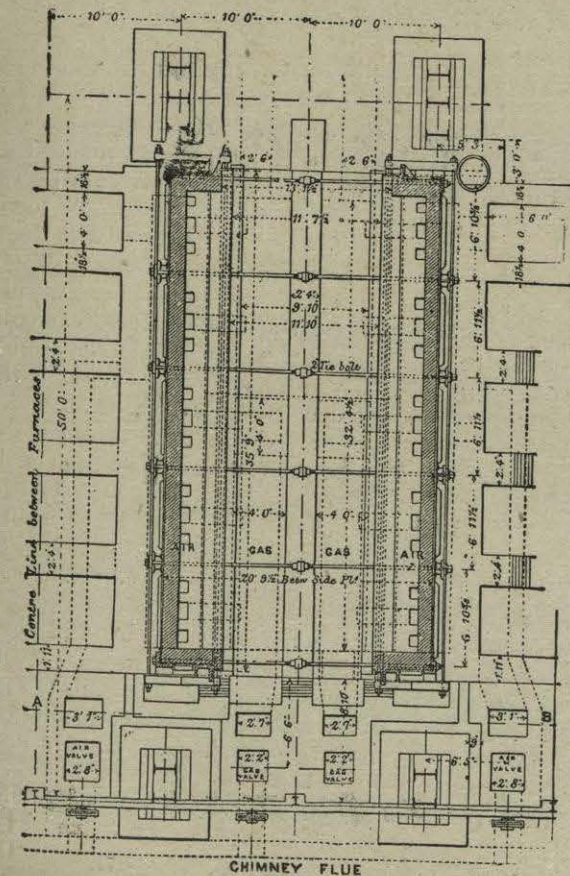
Plan of Gas Furnace for Carburising Armour Plates.
